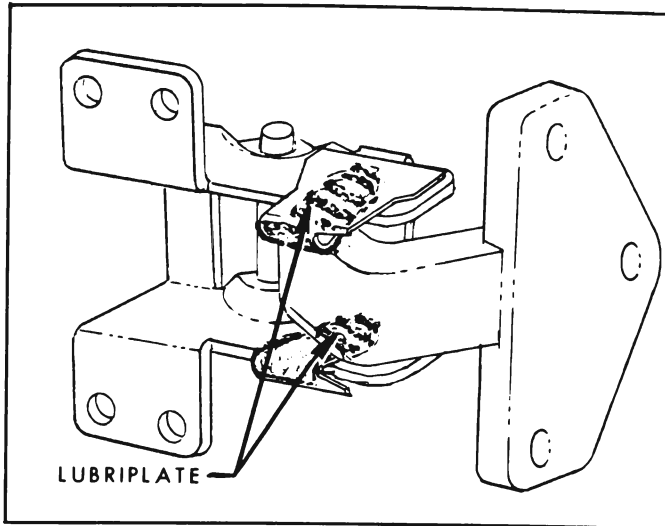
Lubrication of Front Door Hinge and Hold-Open Clips
